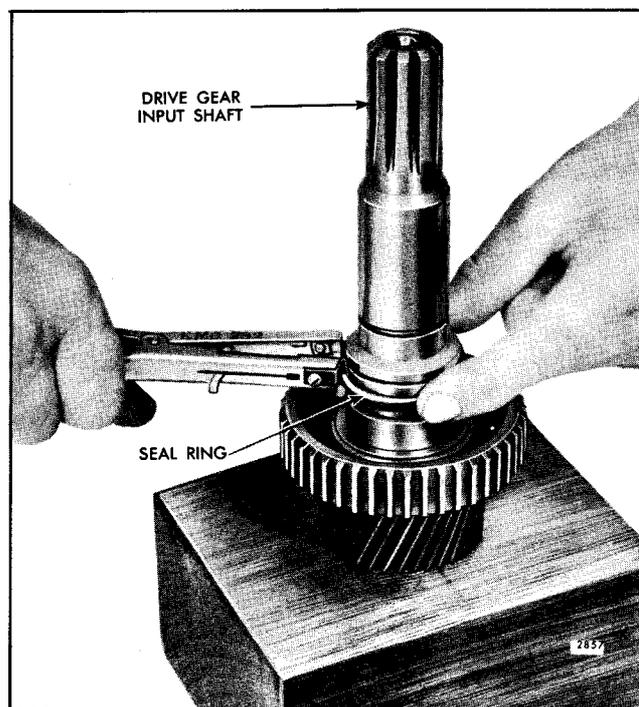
Removing Drive Gear Input Shaft Seal Rings from Shaft
